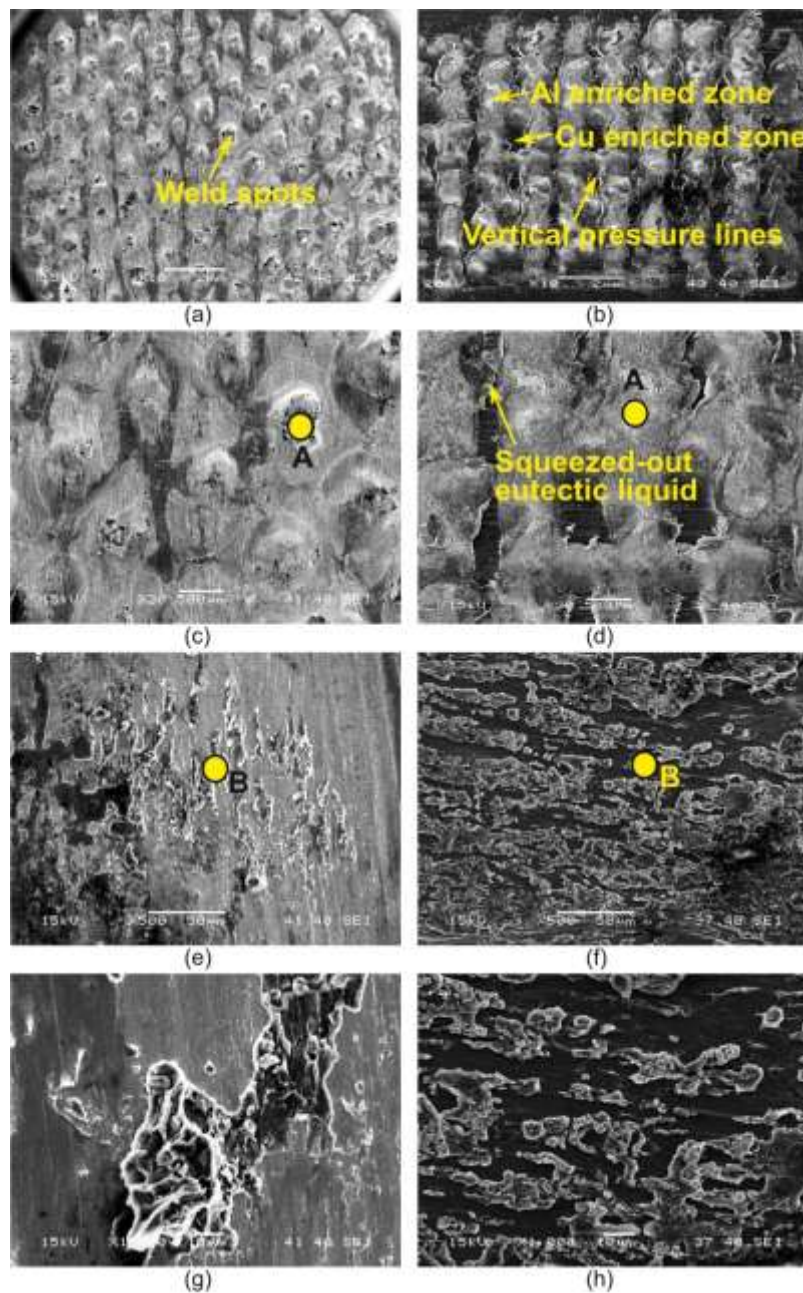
Overall fractured surface SEM images of tensile shear failed samples (a) Al side and (b) Cu side; (c) magnified image of (a) showing weld spots; (d) magnified image of (b) indicating squeezed-out eutectic liquid feature; (e) and (f) magnified pictures of spot A denoted in (c) and (d); (g) and (h) higher magnification images of spot B indicated in (e) and (f)
